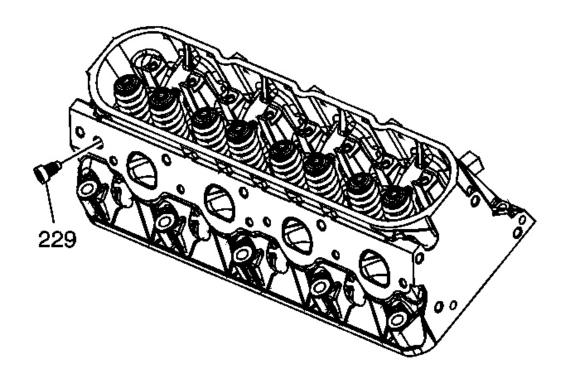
Coolant Plug Courtesy of GENERAL MOTORS CORP.
